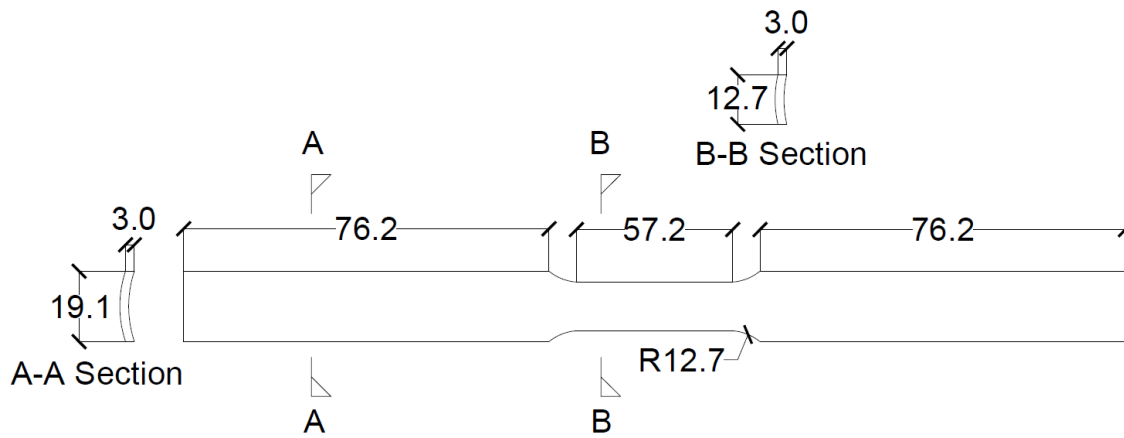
Typical tensile coupon geometry and dimensions (units: mm)
